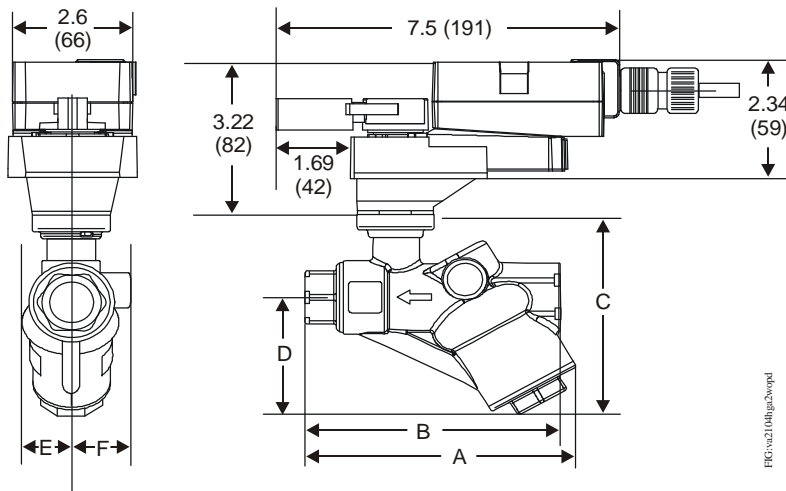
VA2104-HGA-2 Actuated P1000 Valve without Pressure Taps Dimensions, in. (mm)
